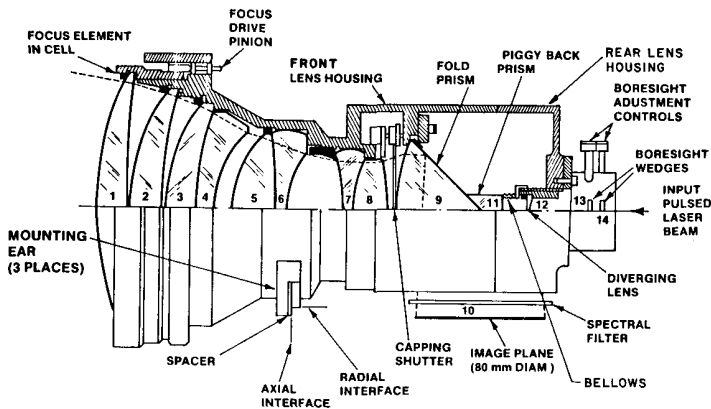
Partial section view of the dual-channel objective assembly. From Ref. 5.
